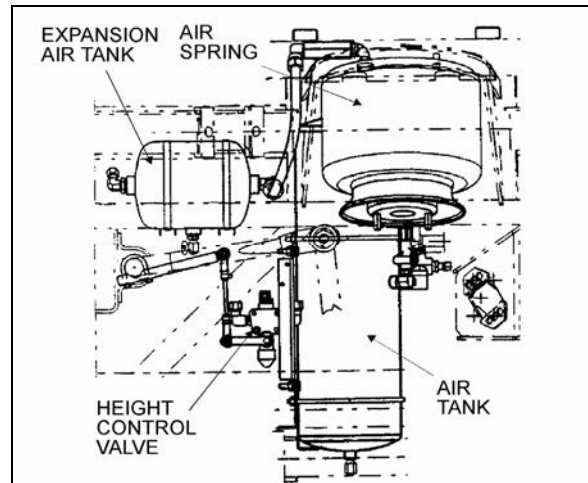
HEIGHT CONTROL VALVE LOCATION 16057
